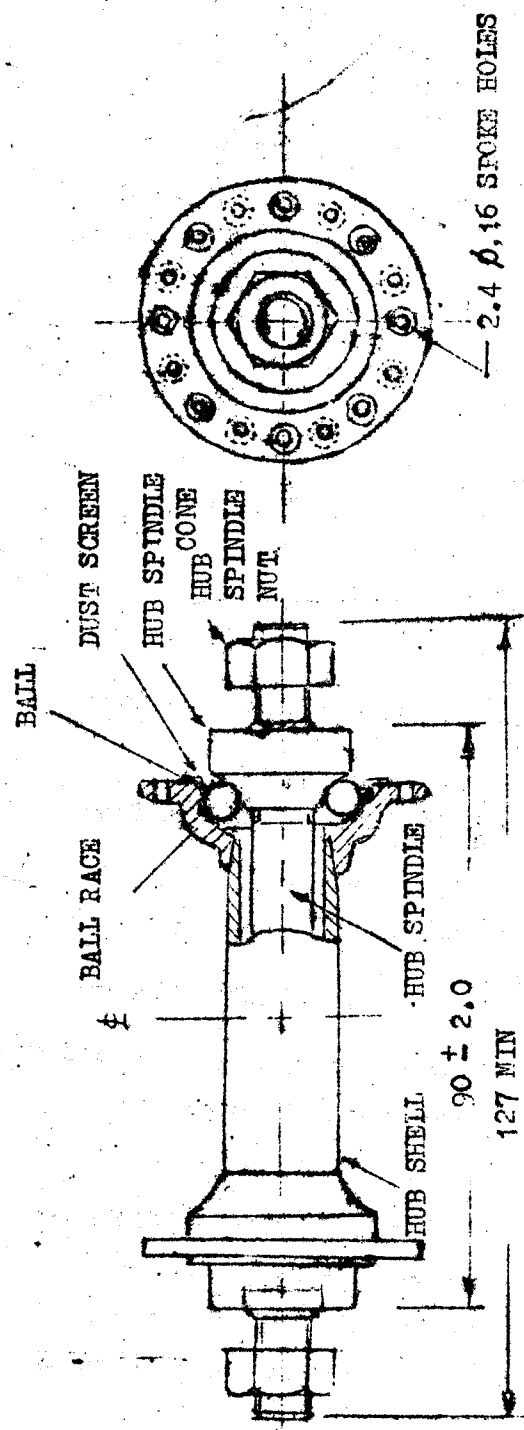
FRONT HUB ASSEMBLY (SCHEMATIC)
